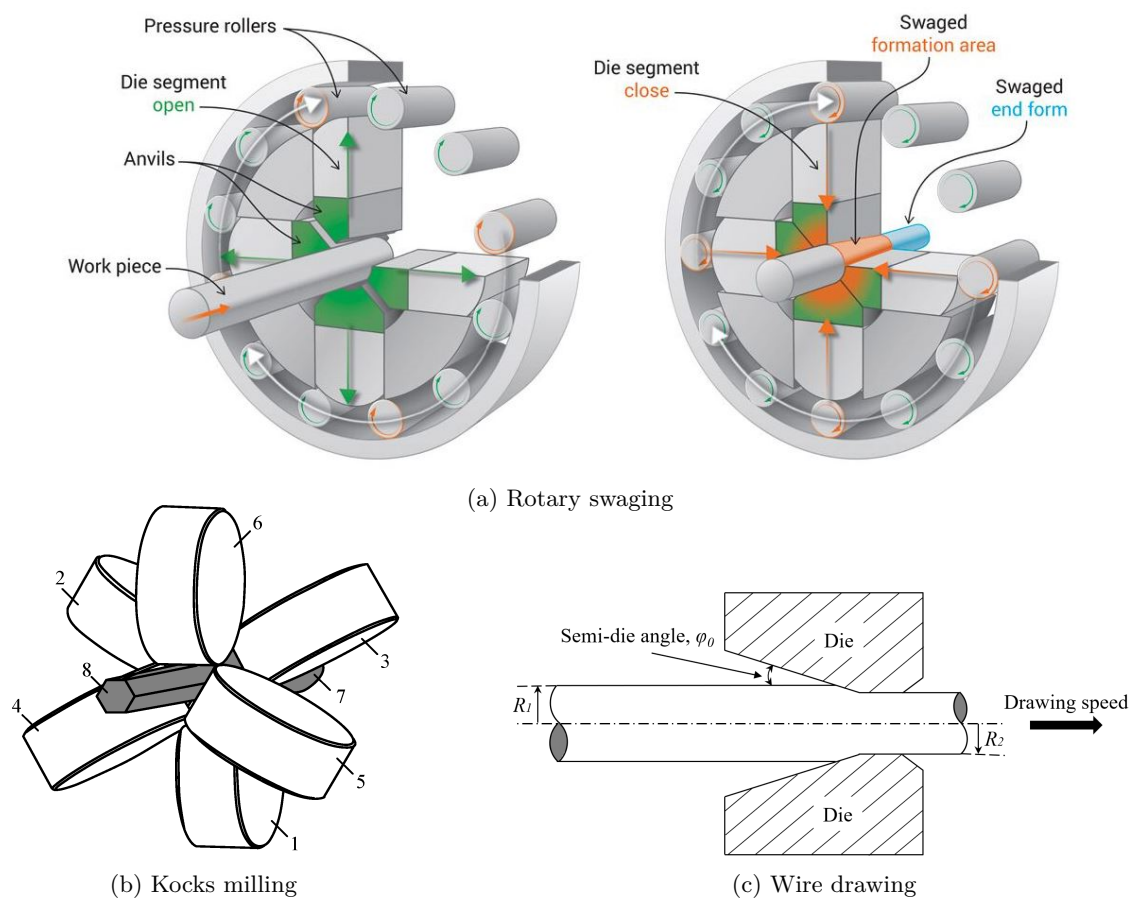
Thermo-mechanical techniques involved in tungsten wire manufacturing: (a) Rotary swaging ©EngineeringClicks, (b) Kocks milling: The mill is segmented into two roll stands (1-3 and 4-6, angle:  $180^\circ$ ) with three rolls each (angle:  $120^\circ$ ) that deform the workpiece (7/8). Image adapted from [163], (c) Wire drawing: Wire radius  $R_1$  before and  $R_2$  after passing through the die with a semi-angle  $\varphi_0$ . Image adapted from [164].
